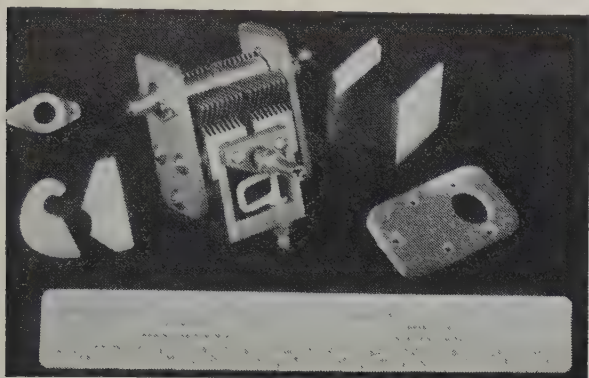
200- to 400-megacycle tuned-circuit elements. *Left*—Bearing and capacitor plates. *Center*—Complete assembly, showing inductance and capacitance trimmers. *Right*—Inductor element and end plate.
